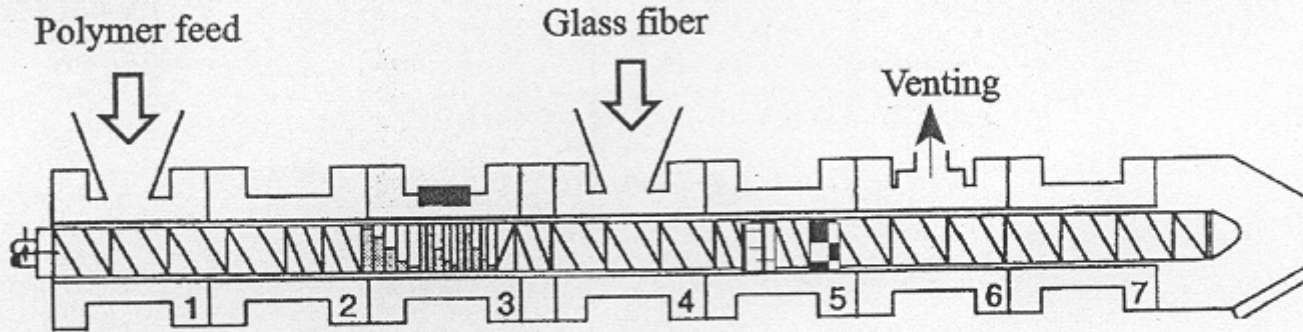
Screw configuration assembled from screw elements for compounding glass fiber (redrawn from Ref. [1])
